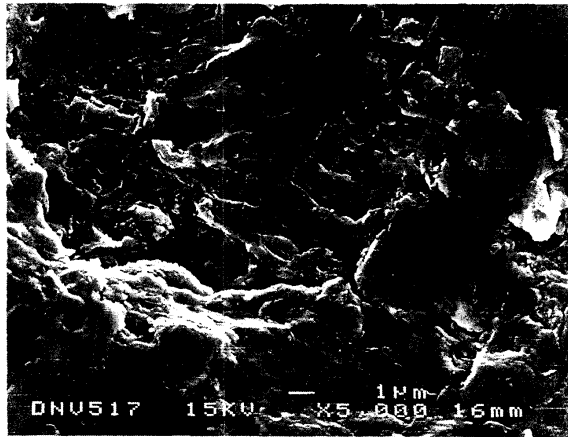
SEM photo representing intact micropattern of the narrow edge zone at a location nearly 180 degrees opposite to the machined groove (ref. Fig. 5). Fatigue striations and parallel microcracking is indicated. Magnification 5000 X
